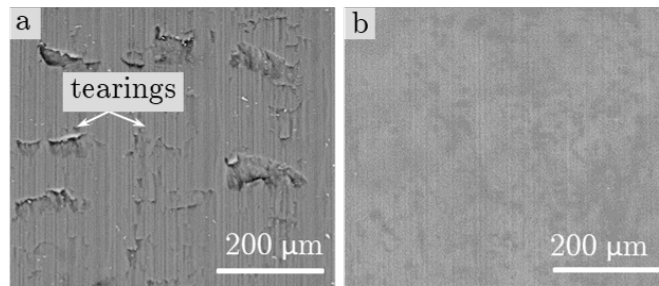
Surfaces cryogenic machined at: (a) 0.2 and (b) 0.01 mm/rev.
